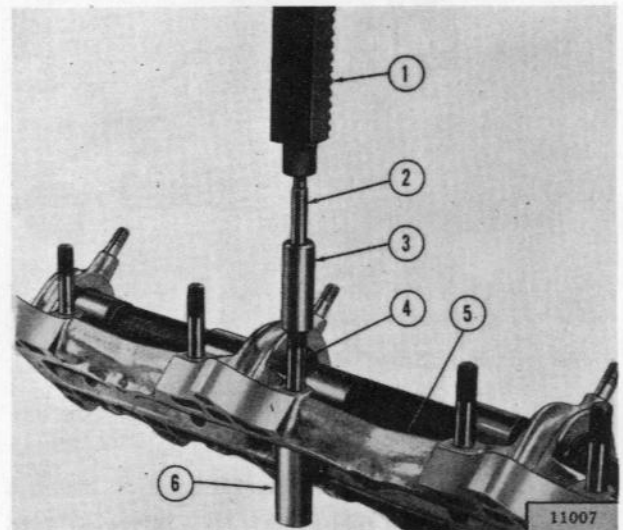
REMOVING ROCKER ARM STUD FROM BEARING DECK WITH TOOL W-266
